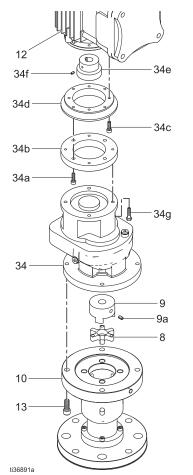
N	Mounting Kit	25N644 onto UL	Motor and Bearing
